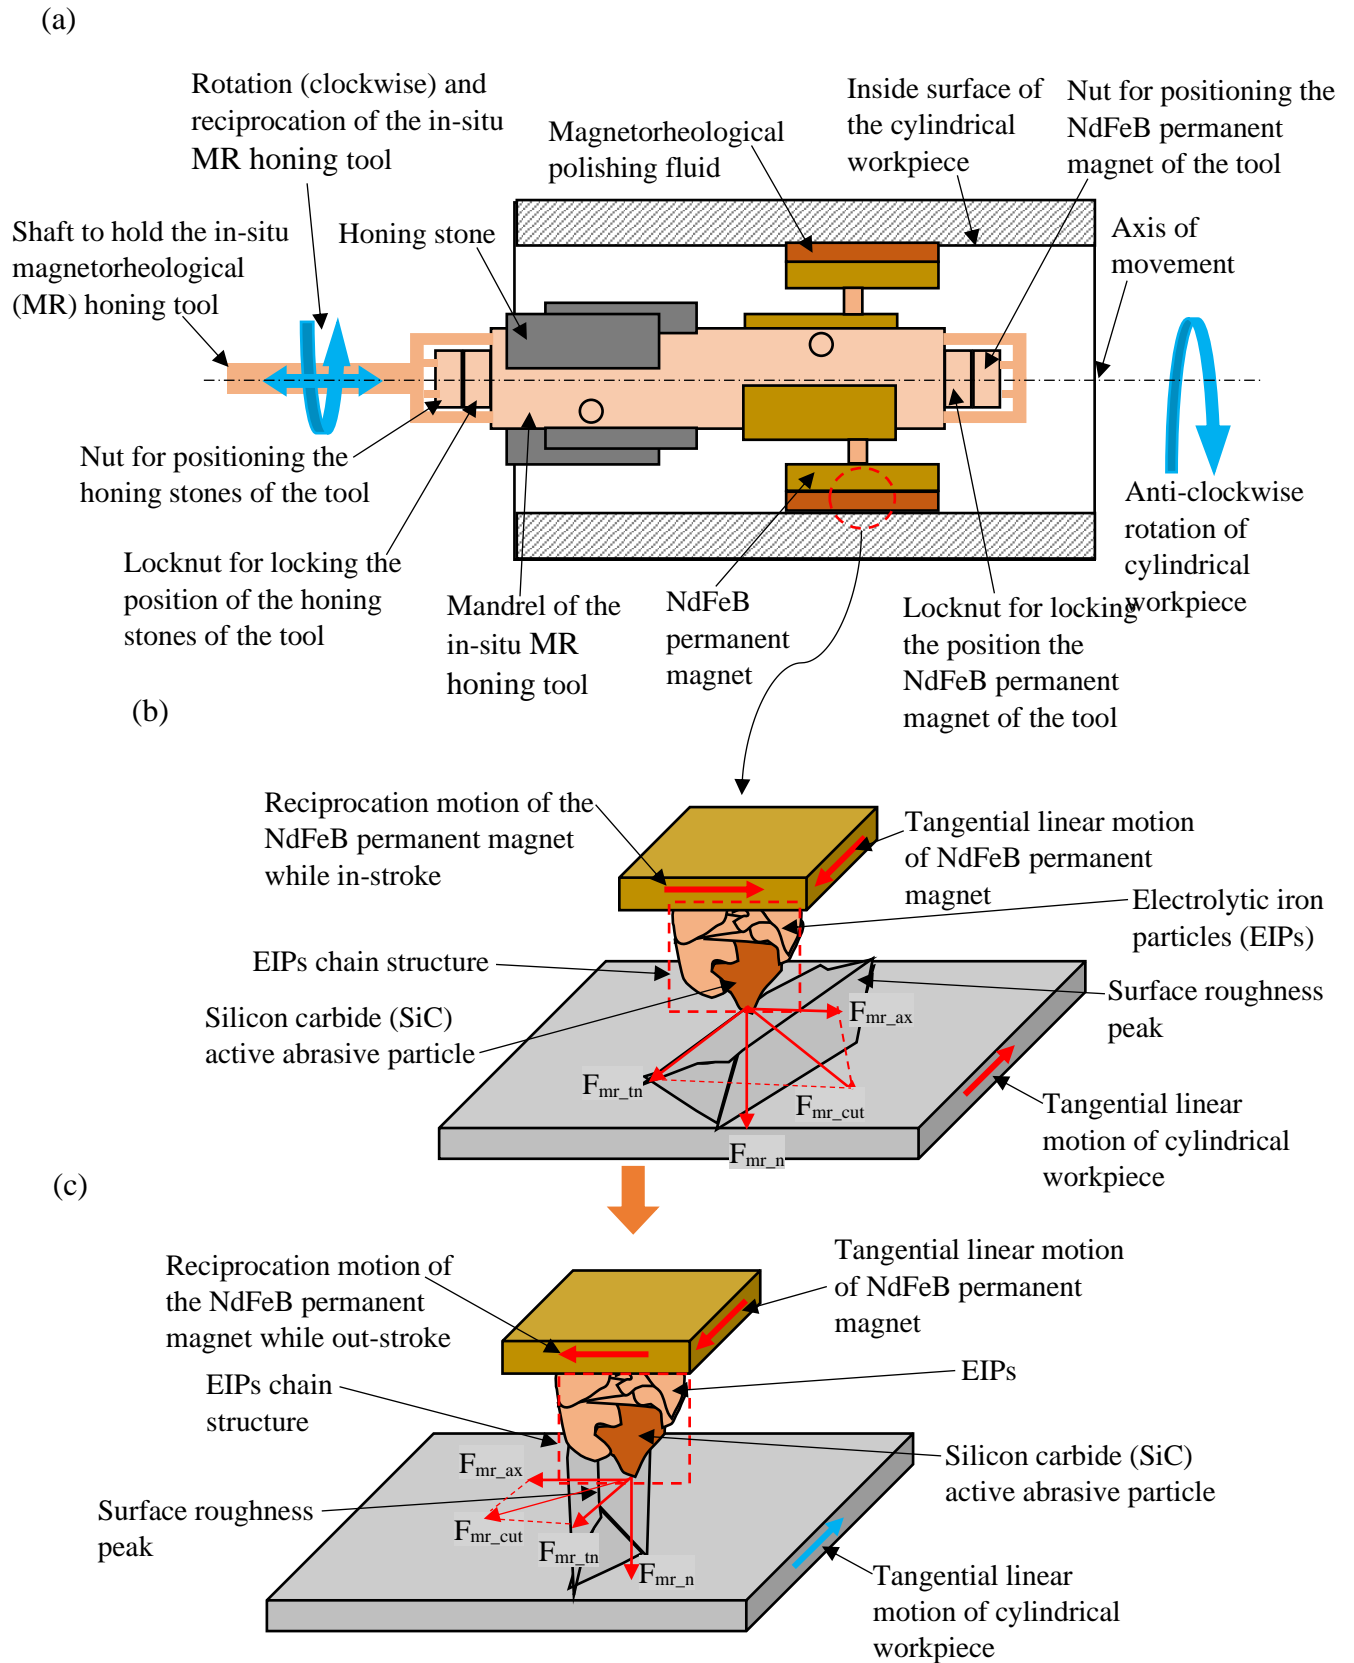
(a) Rotational magnetorheological honing (RMRH) performed on the internal cylindrical workpiece surface using the in-situ magnetorheological honing tool (b) action of finishing forces while in-stroke of the in-situ MRH tool into the cylindrical workpiece, and (c) action of finishing forces while out-stroke of the in-situ MRH tool from the cylindrical workpiece.
